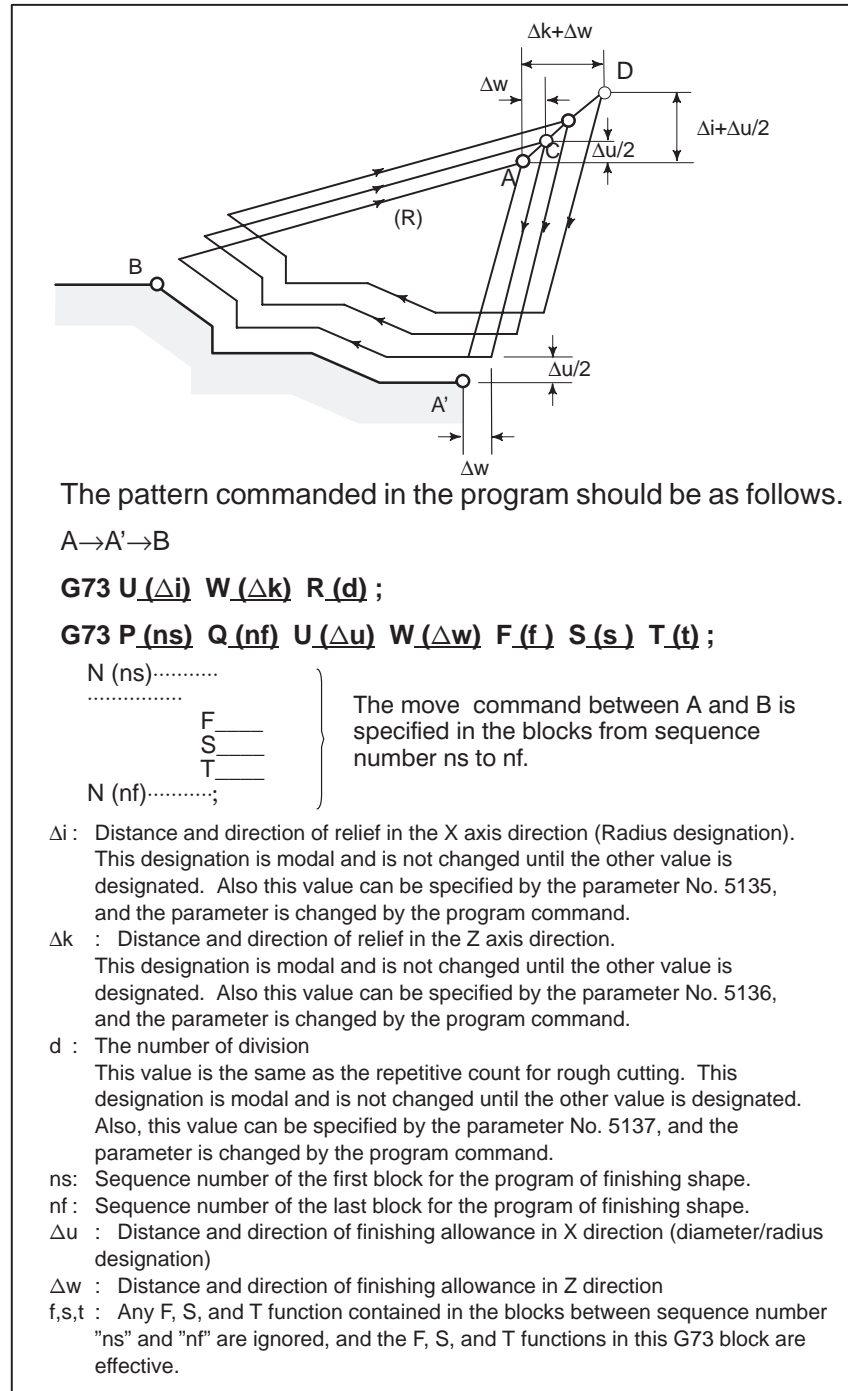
(a) Cutting path in Pattern Repeating
